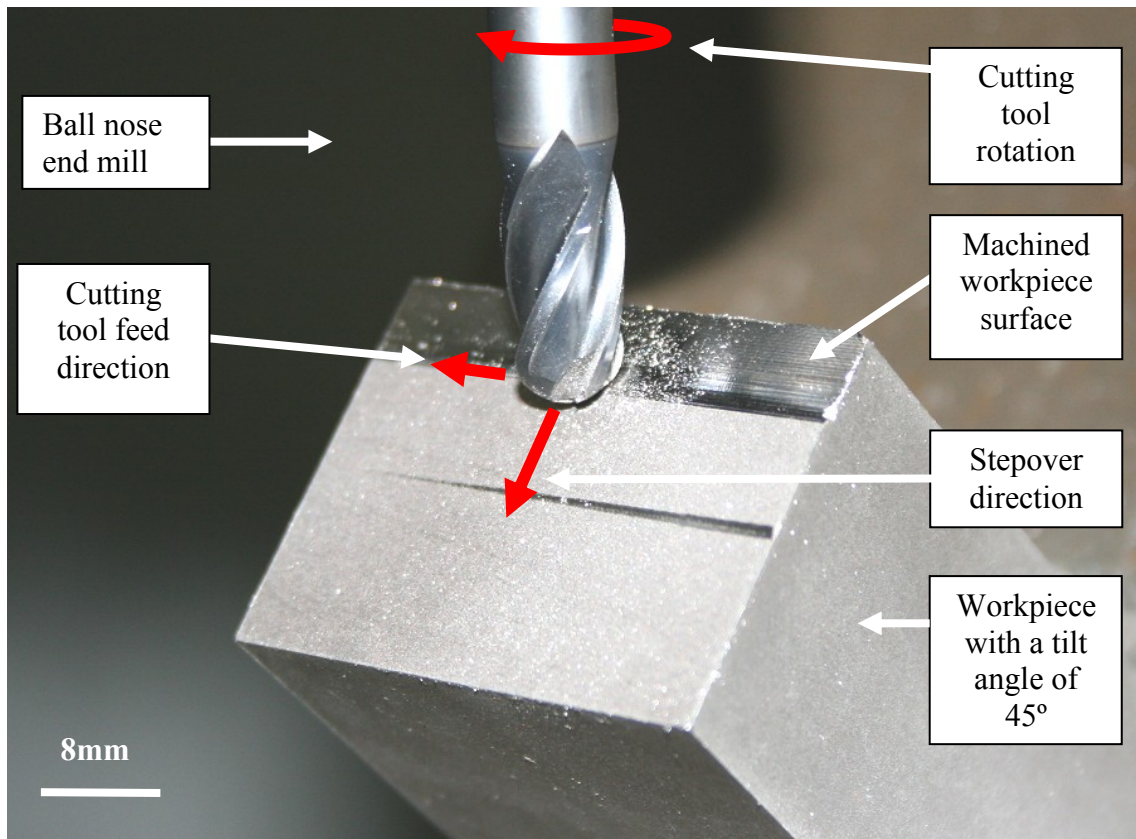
Schematic showing down milling in a horizontal downwards direction using a ball nose end mill and a workpiece tilt angle of 45°
